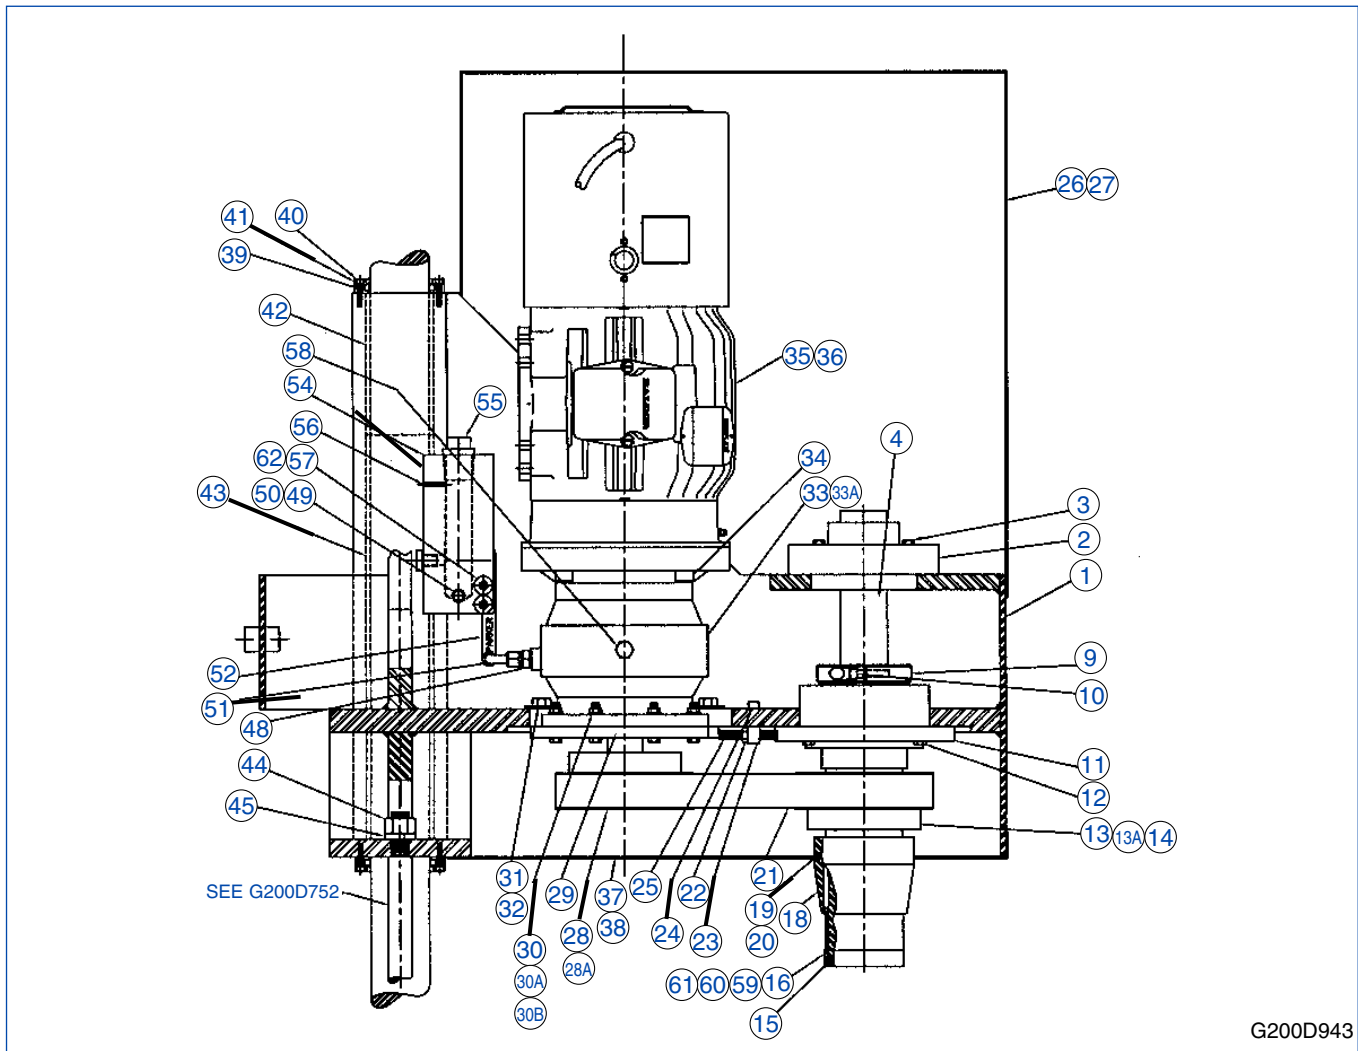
D – SPINDLE CARRIAGE ASSEMBLY (HEAVY DUTY)
